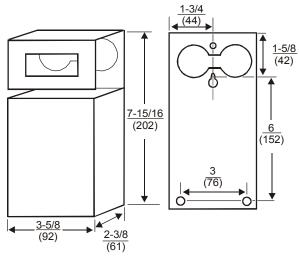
Relay Pack with Mounting Bracket Dimensions, in. (mm)
